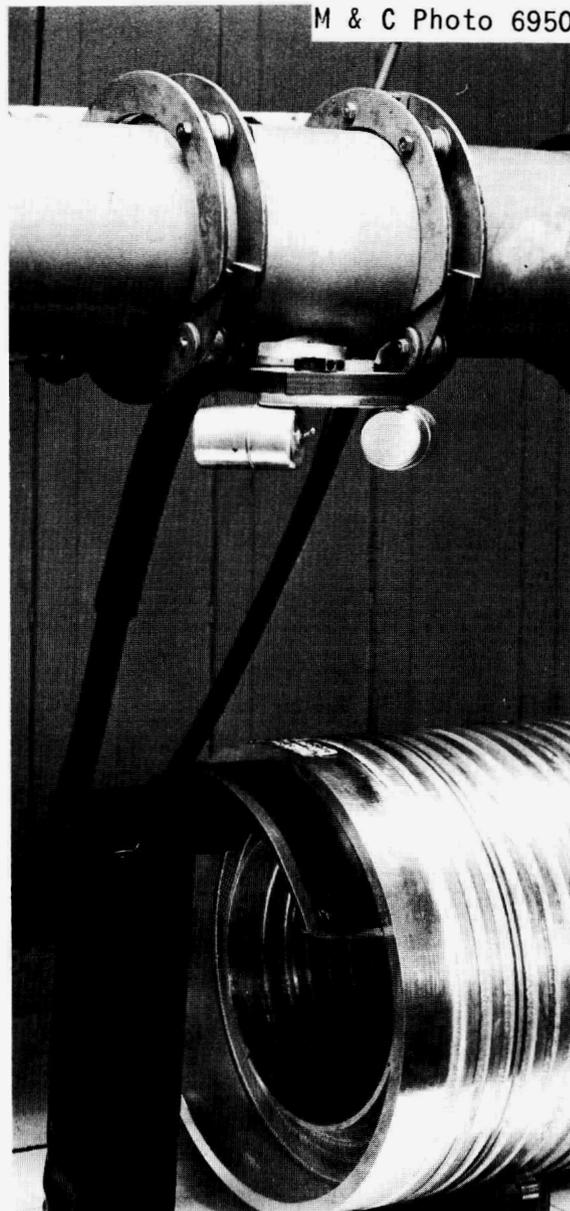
Radiography of Outer Fuel Element Adapter Welds.
